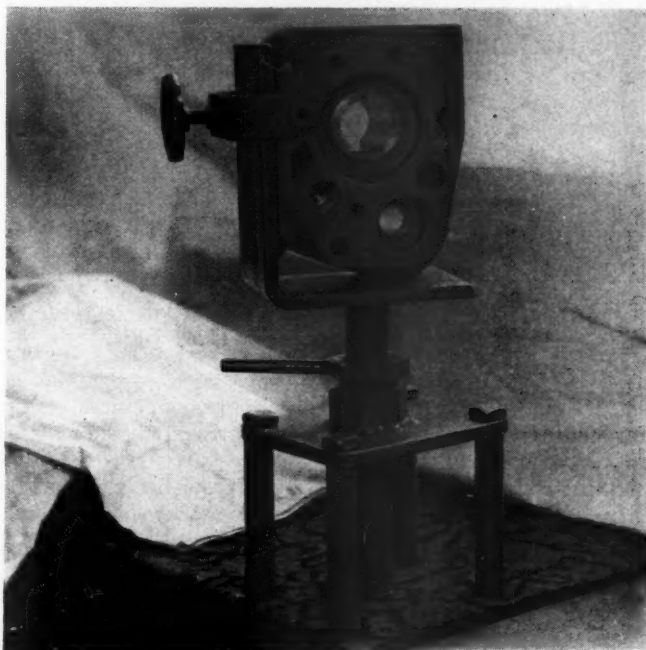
Stand and clamp for holding AB valve portions while doing repair work
